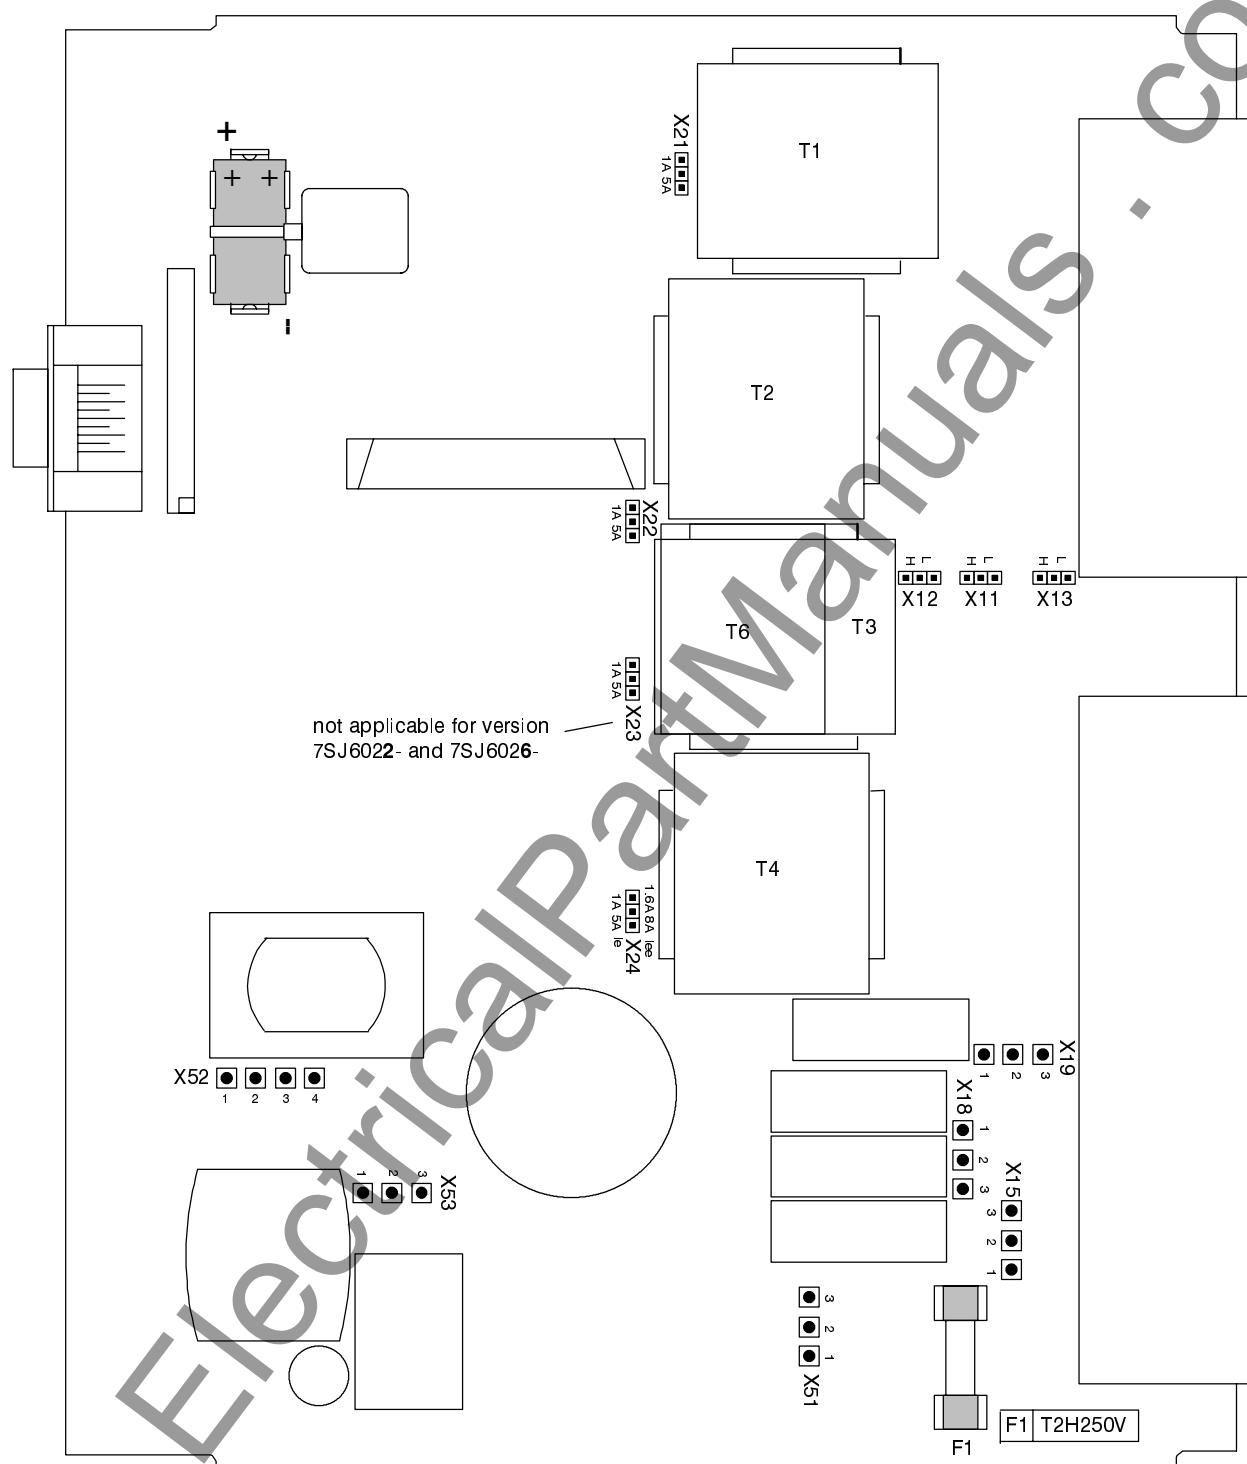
CPU602V2 module – illustration of the jumpers on the printed circuit board
